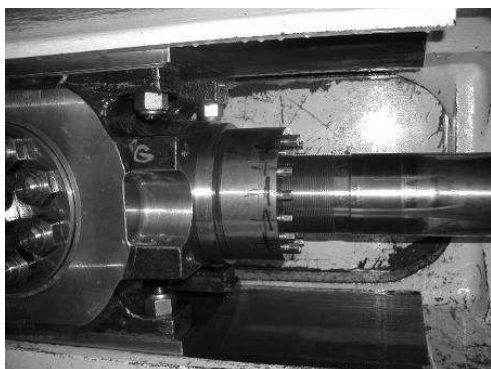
Multi bolt tensioned piston rod to crosshead connection
